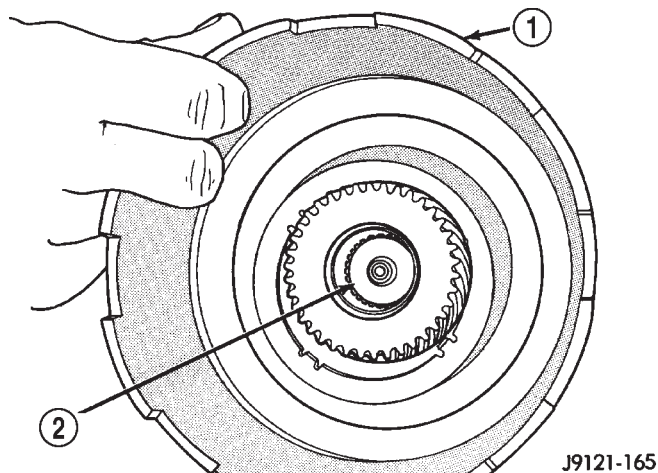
Installing Assembled Sun Gear And Driving Shell On Output Shaft
